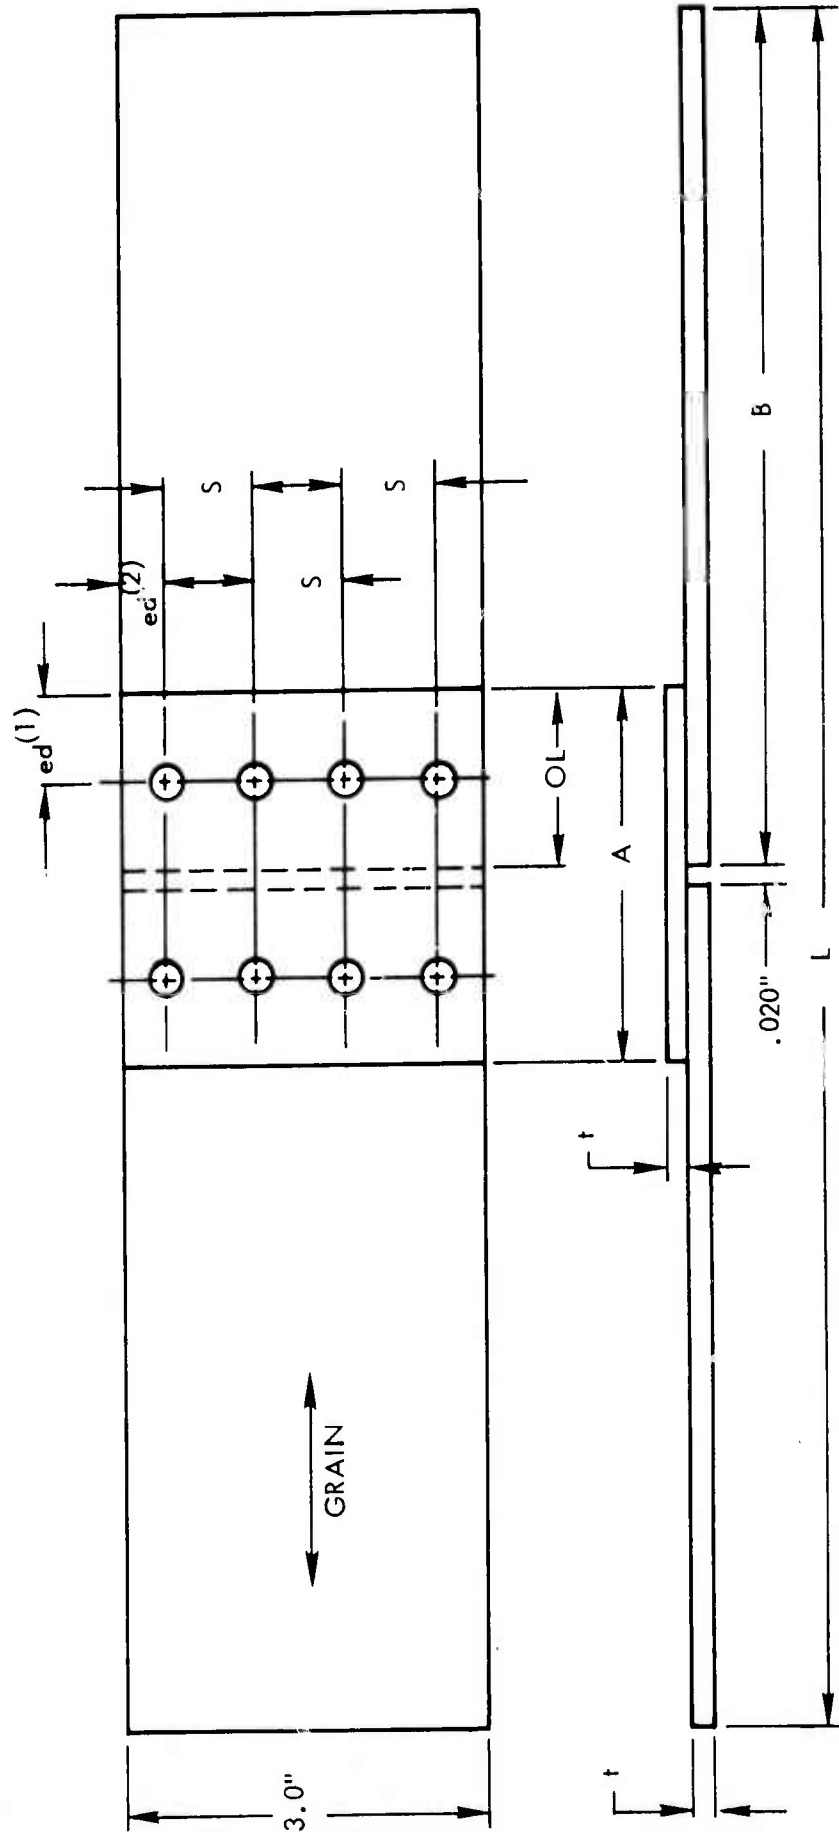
CENTERED ROW WELD PATTERN SPECIMEN (4 WELD SPACING)
